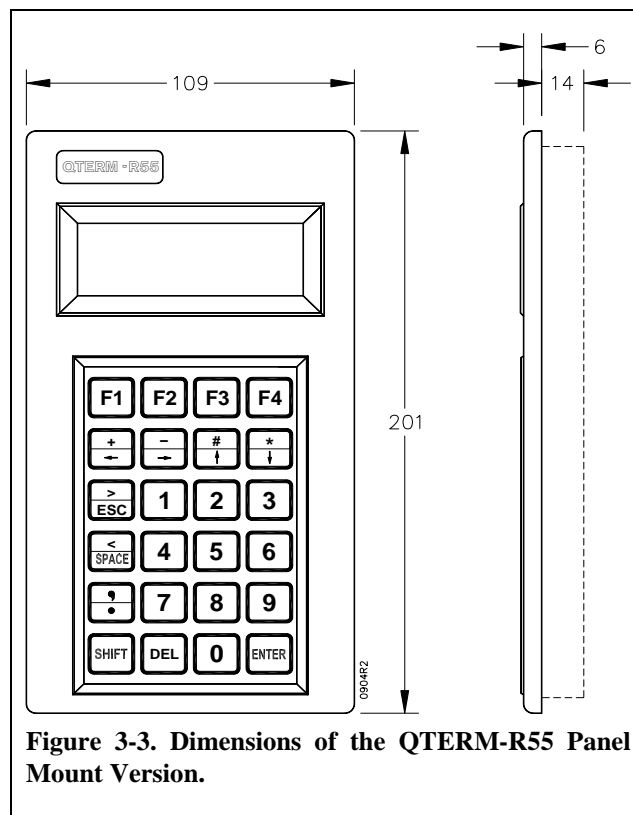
Dimensions of the QTERM-R55 Panel Mount Version.
